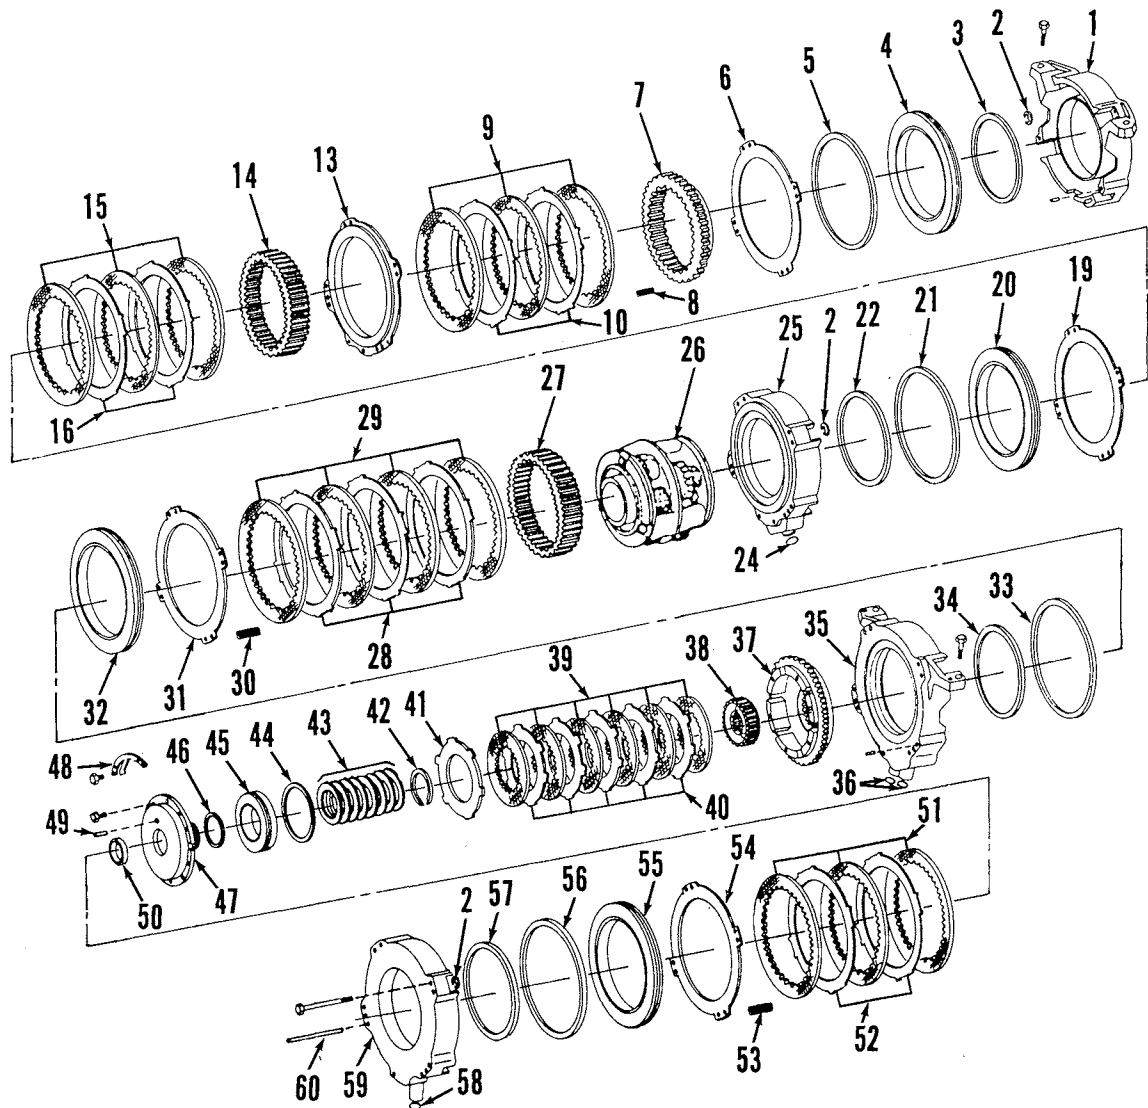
Exploded view of output planetary assembly typical of all Power Shift models. Retainer plate (48) is used on Models 4050, 4250 and 4450 only. Antirotation dowel pin (49) is used on Models 4650 and 4850 only. Dowel pins (60) are not used on Model 4450.
